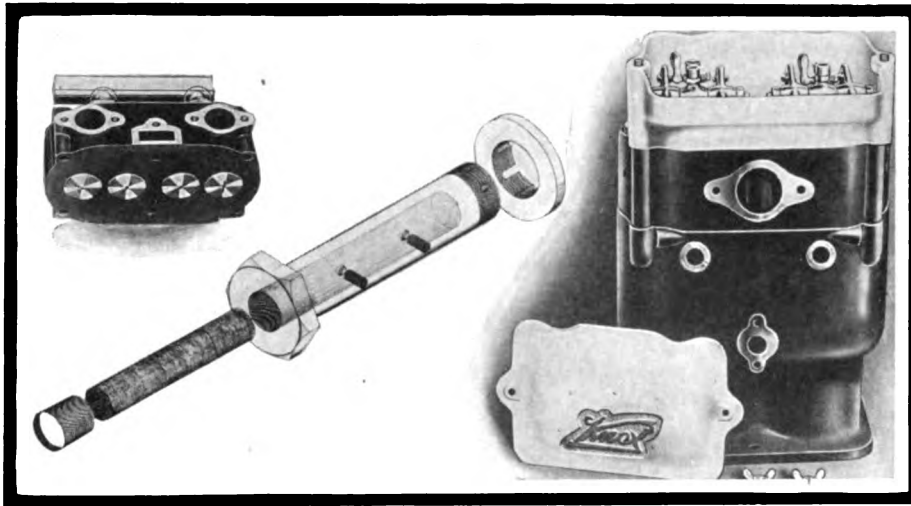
Cylinders with valves, lubricated shackle bolt, assembled cylinder block
